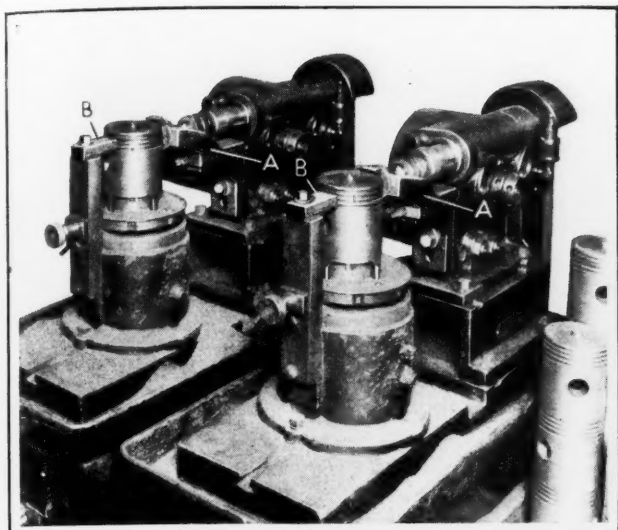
Machines Employed in Drilling the Oil-holes around the Piston Grooves
